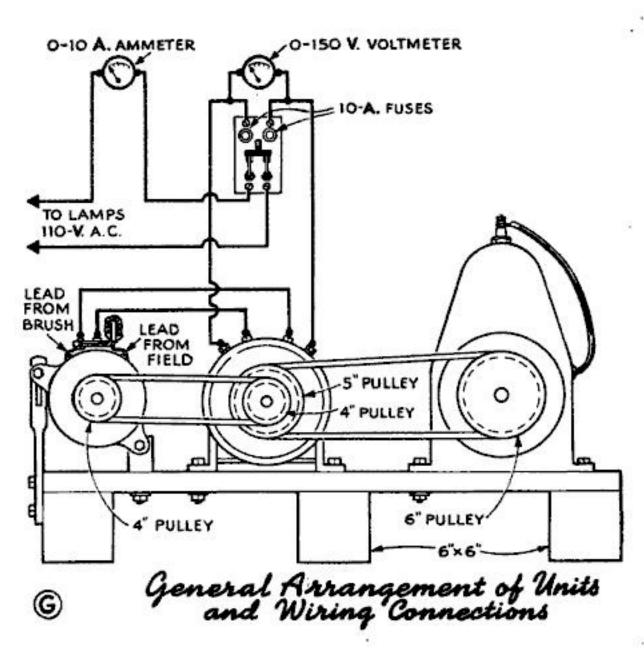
Drawing G shows the general arrangement of the units and the wiring plan. A speed counter should be used when first starting the plant to determine the best engine-speed settings. For 60 cycles the generator must be run close to 1,800 r.p.m. Once set, the engine governor should regulate it fairly uniformly. The voltage is then checked, and it should be around 115 volts, no load. If it is high or low, don't change the engine speed, but try varying the exciter speed with a larger or smaller pulley,
